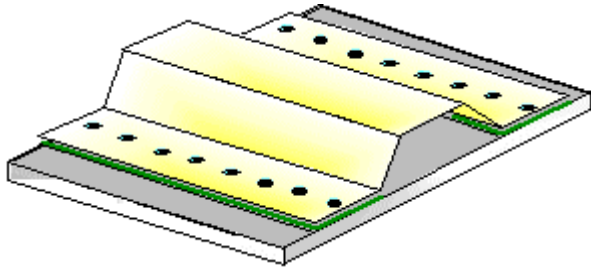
Candidate hybrid joint consisting of a composite hat-section bonded and riveted to a steel plate.
